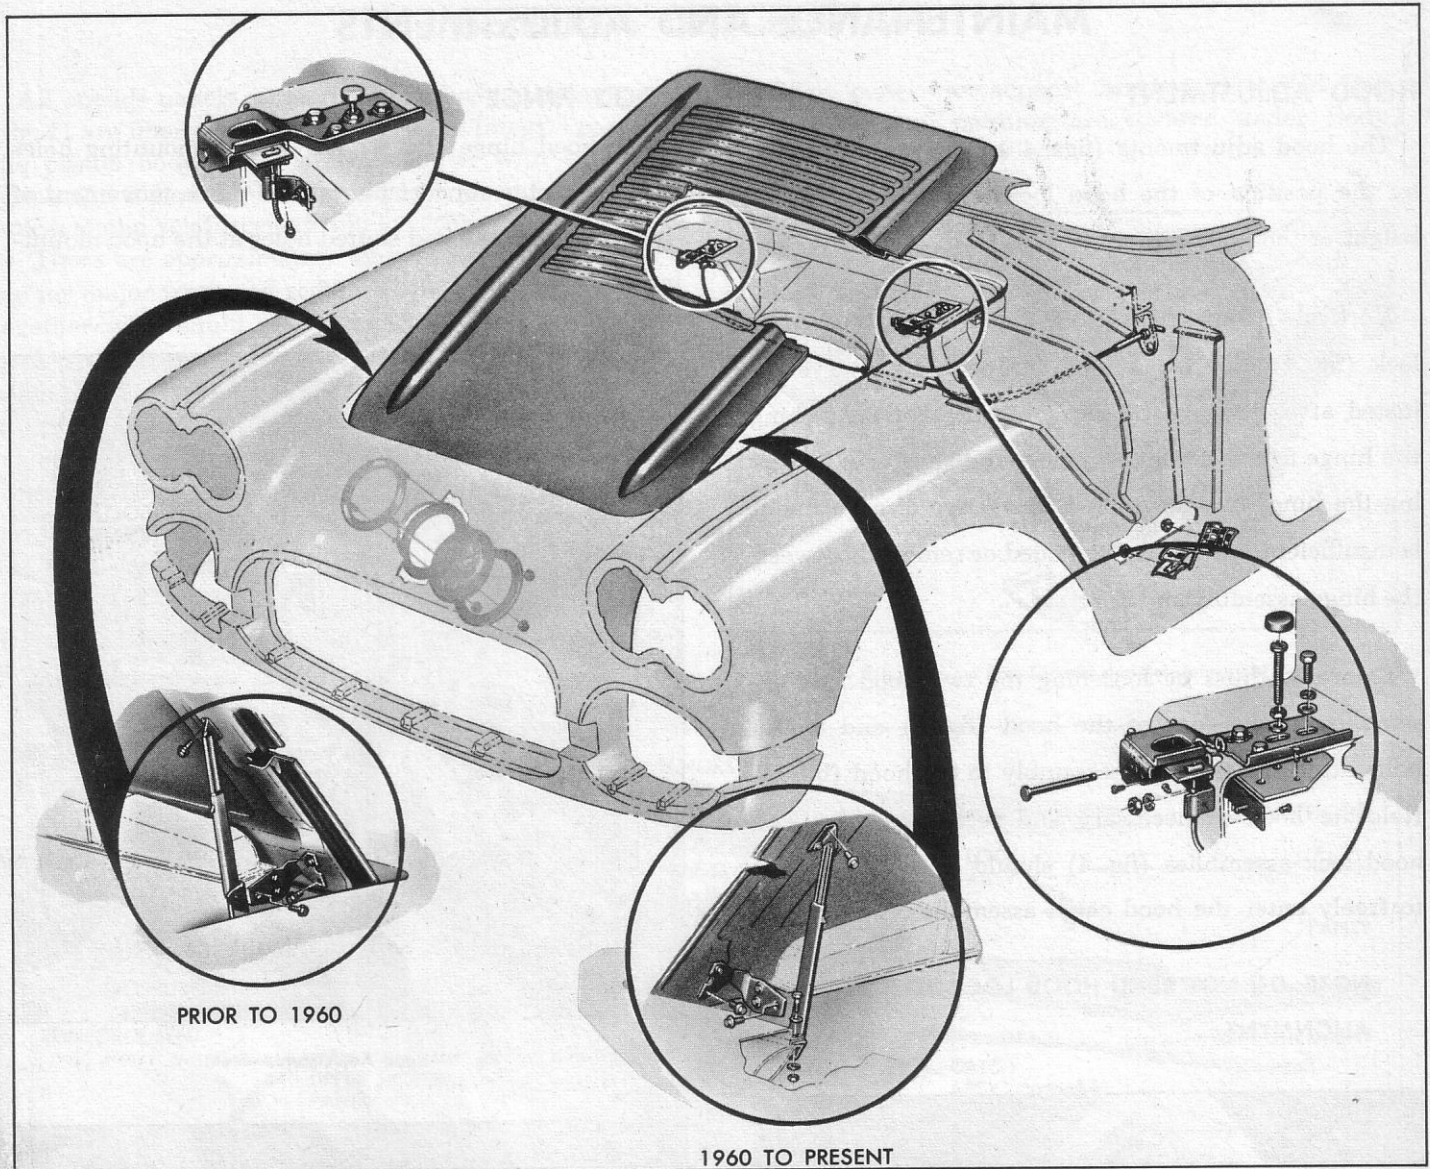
Hood Catch Assemblies, Bumpers and Supports
